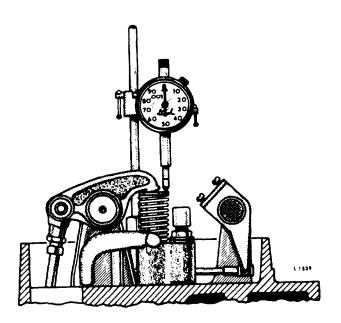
B-146. Checking Engine Timing by Measuring Injector Depression
